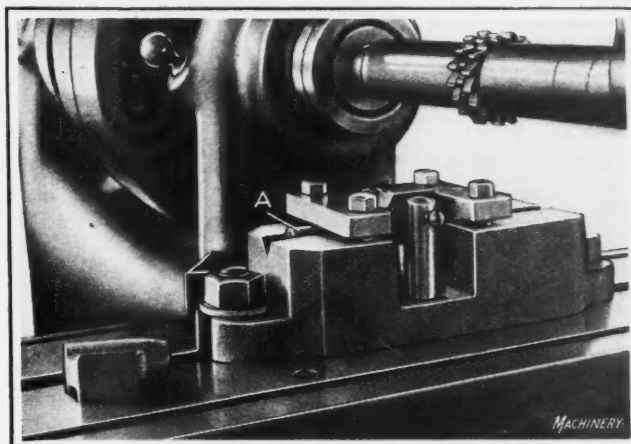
Equipment used for milling the Surfaces by which the Table Stem Bearing is fitted to the Stand
